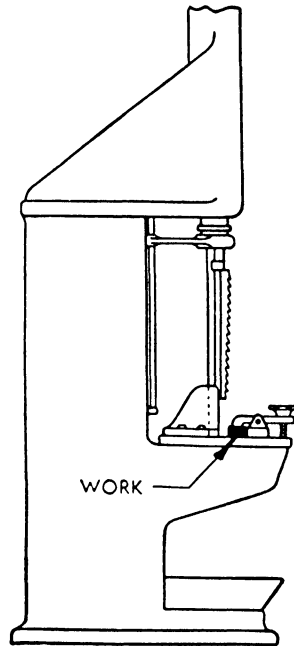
Push-type vertical broaching machine adapted for cutting light surfacing operations in which the tool holder is backed up by the bracket shown attached on the table of the machine.
